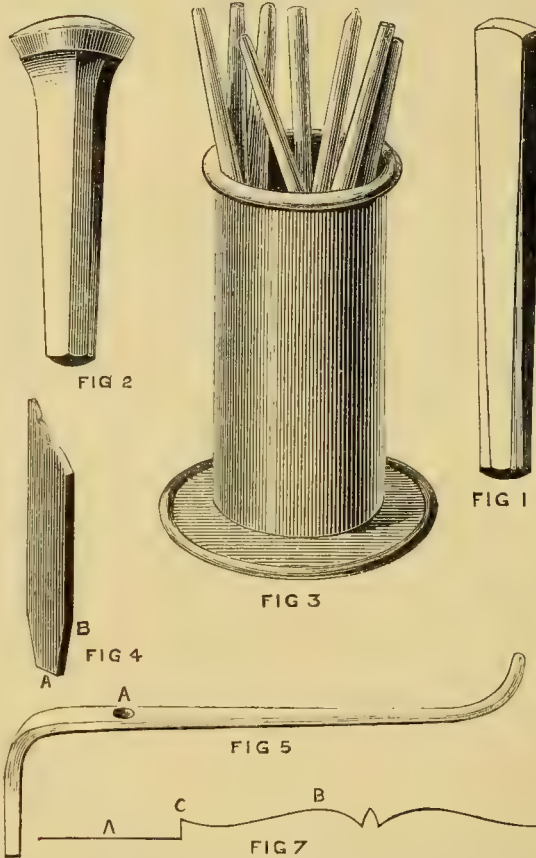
BEATER. FIG. 2.—BEATER. FIG. 3.—TOOL HOLDER.
